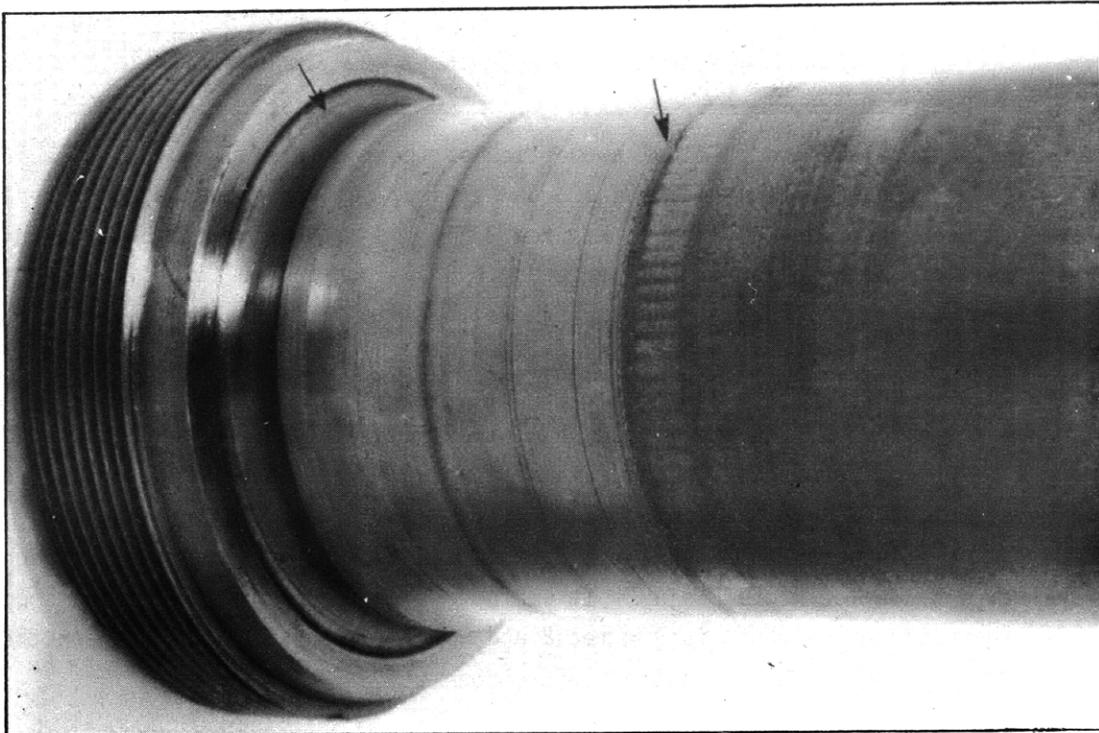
Piston End of Metal-Coated Specimen before Testing
